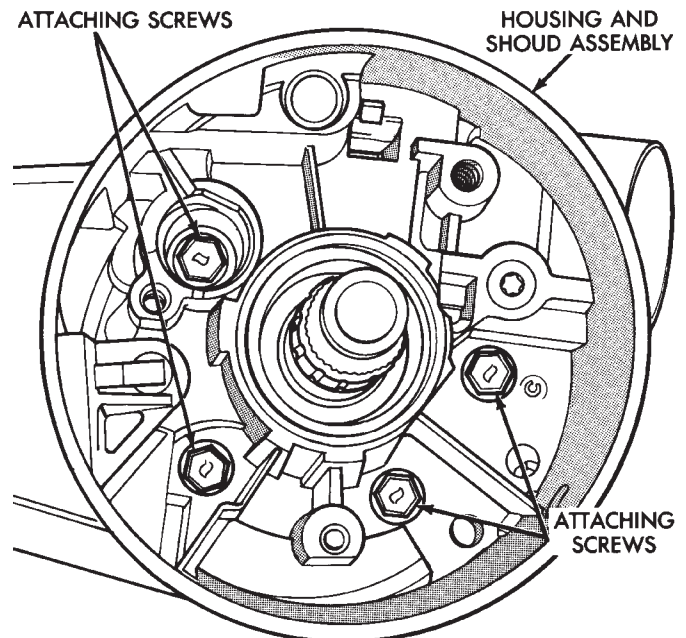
Lockplate RemovalKEY/LOCK CYLINDER
